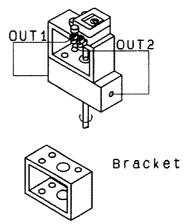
Mounting by positioner back screw Install using screw hole at the positioner back and the screw hole at the actuator top.
